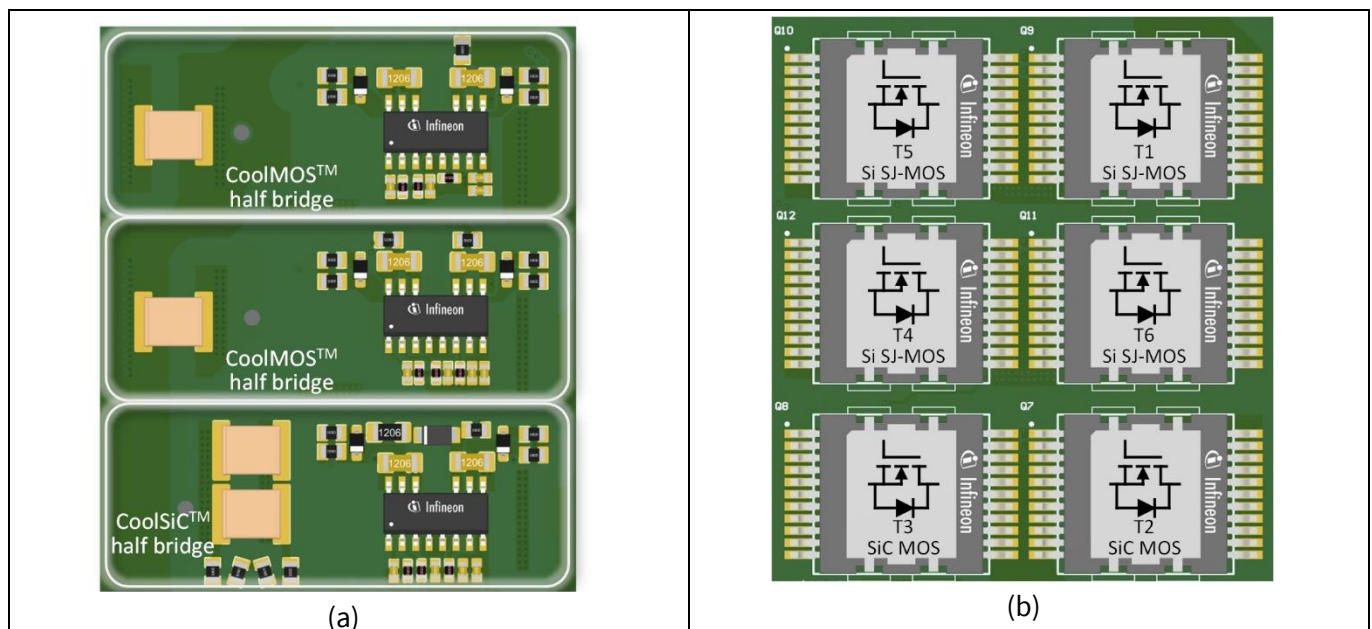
Phase-leg layout visualization; (a) top-side of PCB; (b) bottom-side of PCB
